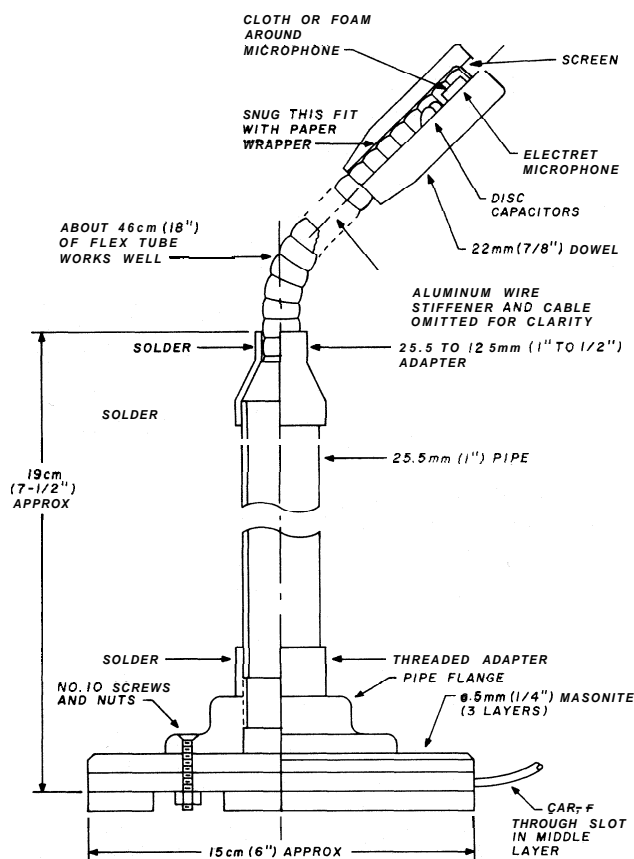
Mechanical layout of the desk microphone described in the text. The construction shown is for guidance only. Most builders will substitute materials on hand and their own techniques of fastening things together. A push-to-talk switch can be mounted on the base if desired.
